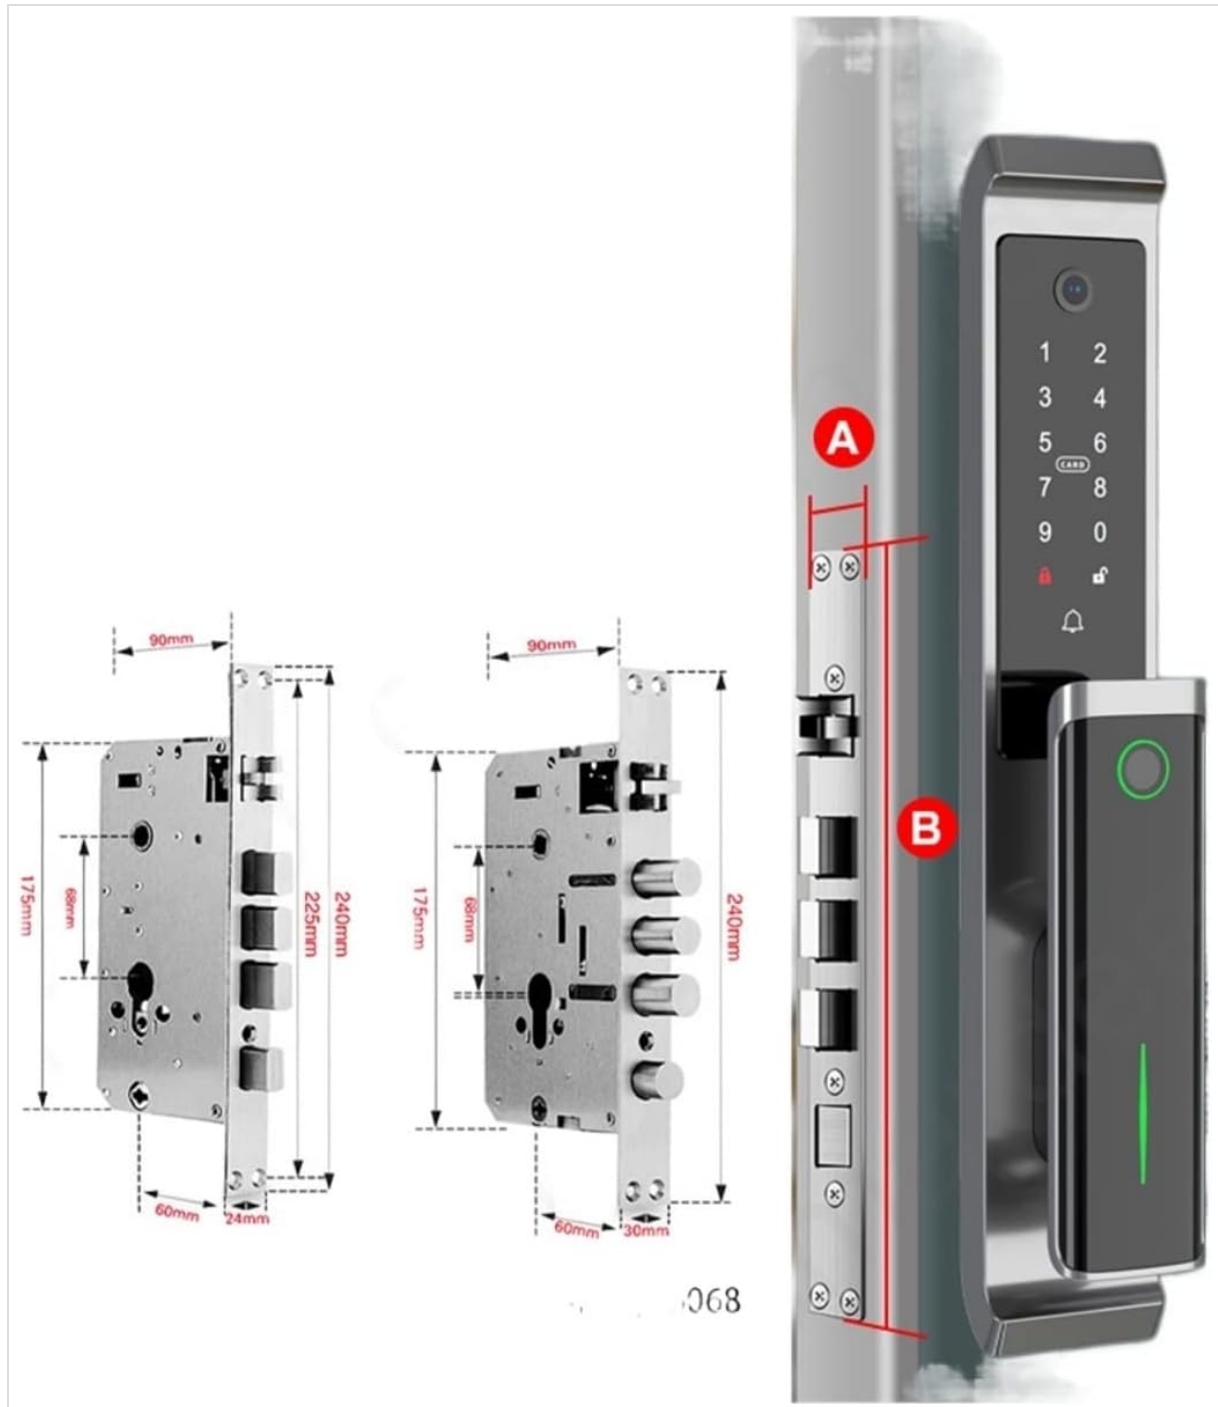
Mechanical dimensions and internal components of the lock for installation reference.
